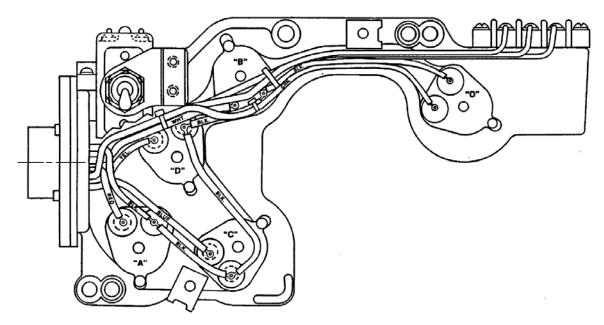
Underside of Receiver Assembly Showing Wire Colors
